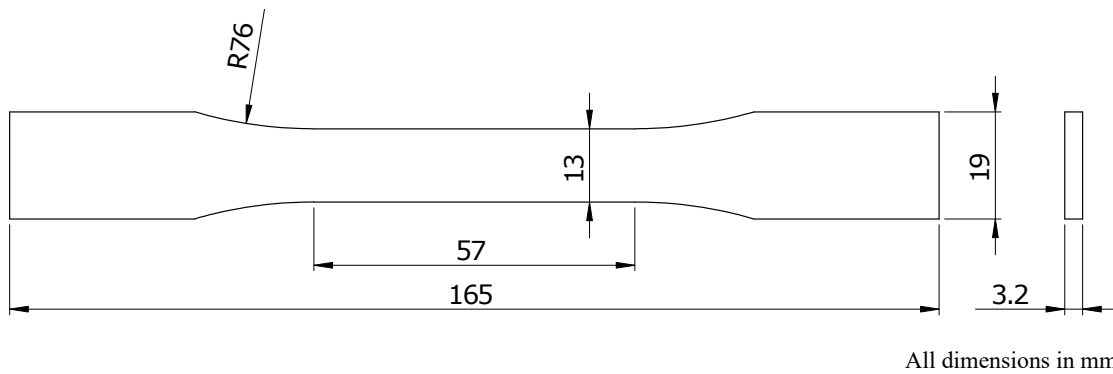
Nominal dimensions of the Type I test specimens used for tensile testing [451].
